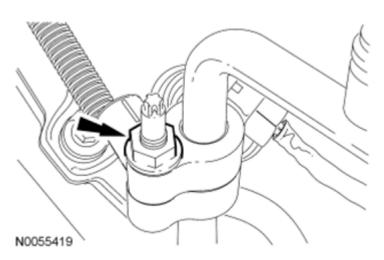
Locating A/C Pressure Tube Fitting And Nut Courtesy of FORD MOTOR CO.
